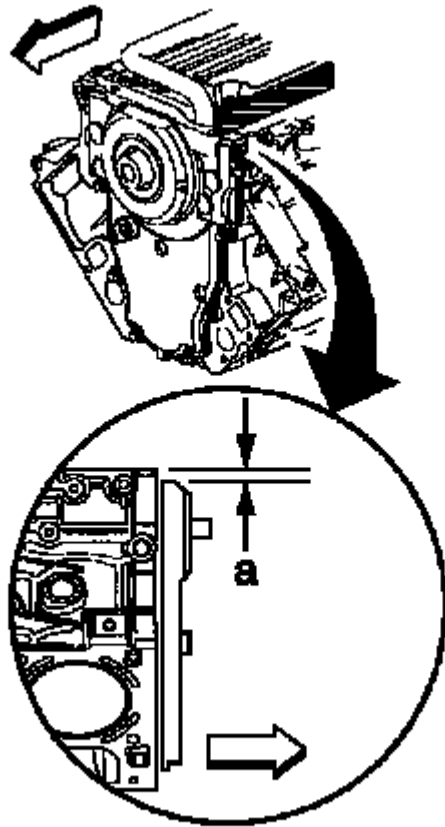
Measuring Oil Pan Surface Flatness & Front Cover-To-Engine Block
